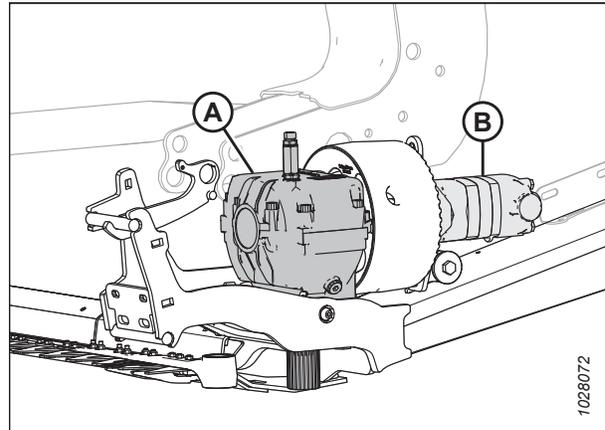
Left Knife Drive Box Shown – Right Similar
